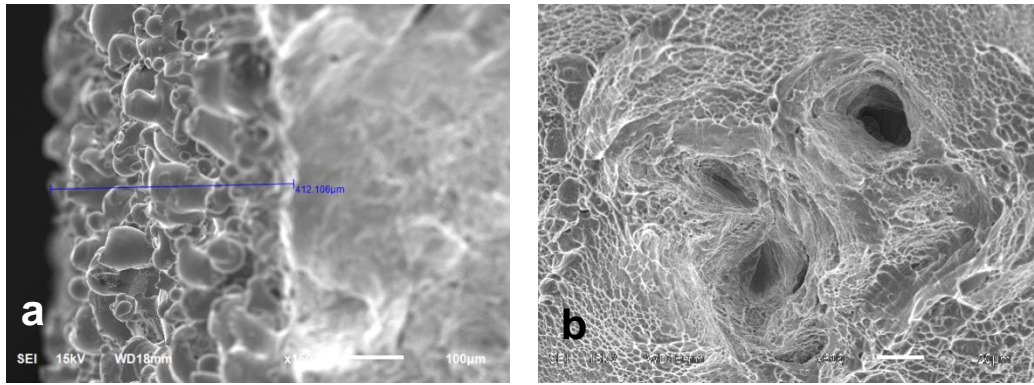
Tensile Fracture surface of the as manufactured Ti6Al4V DMLS component
